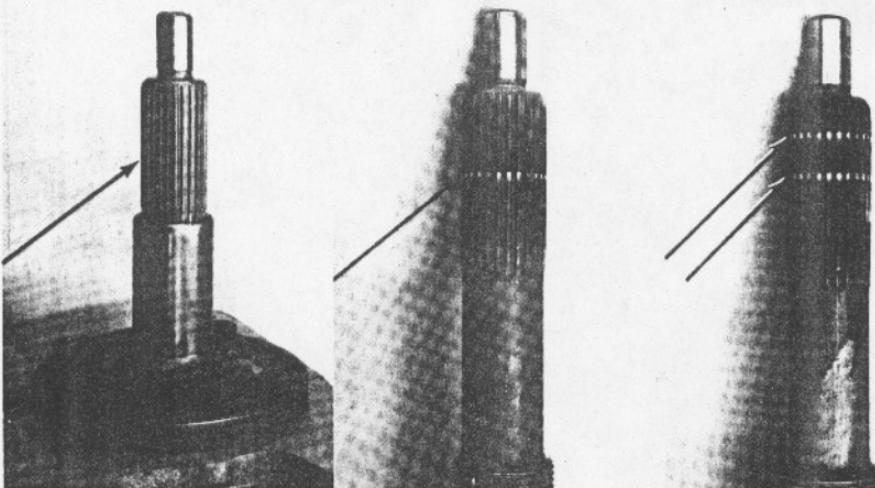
Illustrated transmission identifying the circumferential grooves on input shaft.
